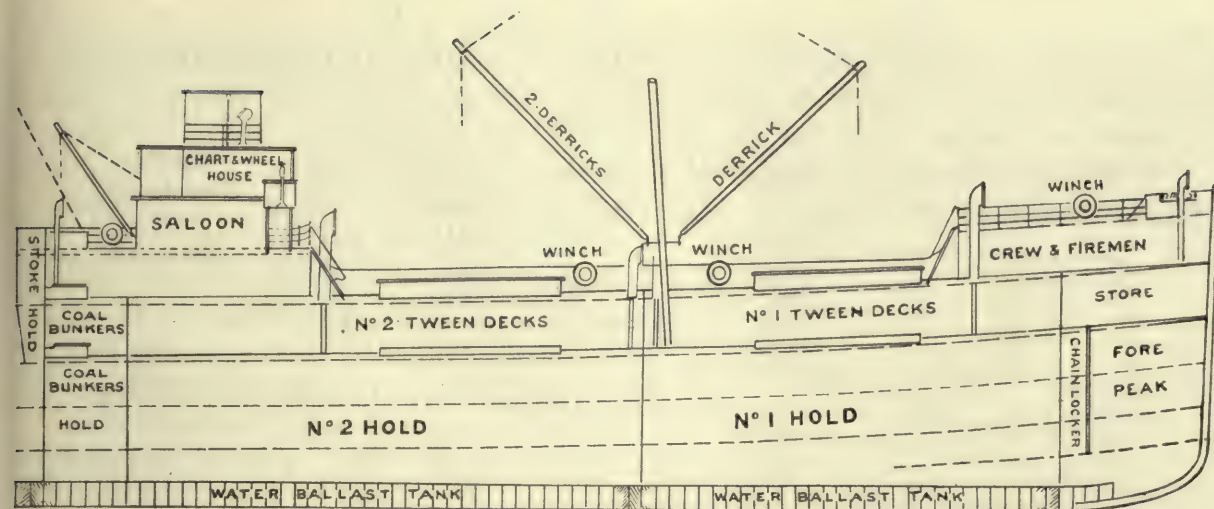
SECTION OF A DOXFORD "TURRET" FORM STEAMER, WITH LARGE CLEAR HOLD.
